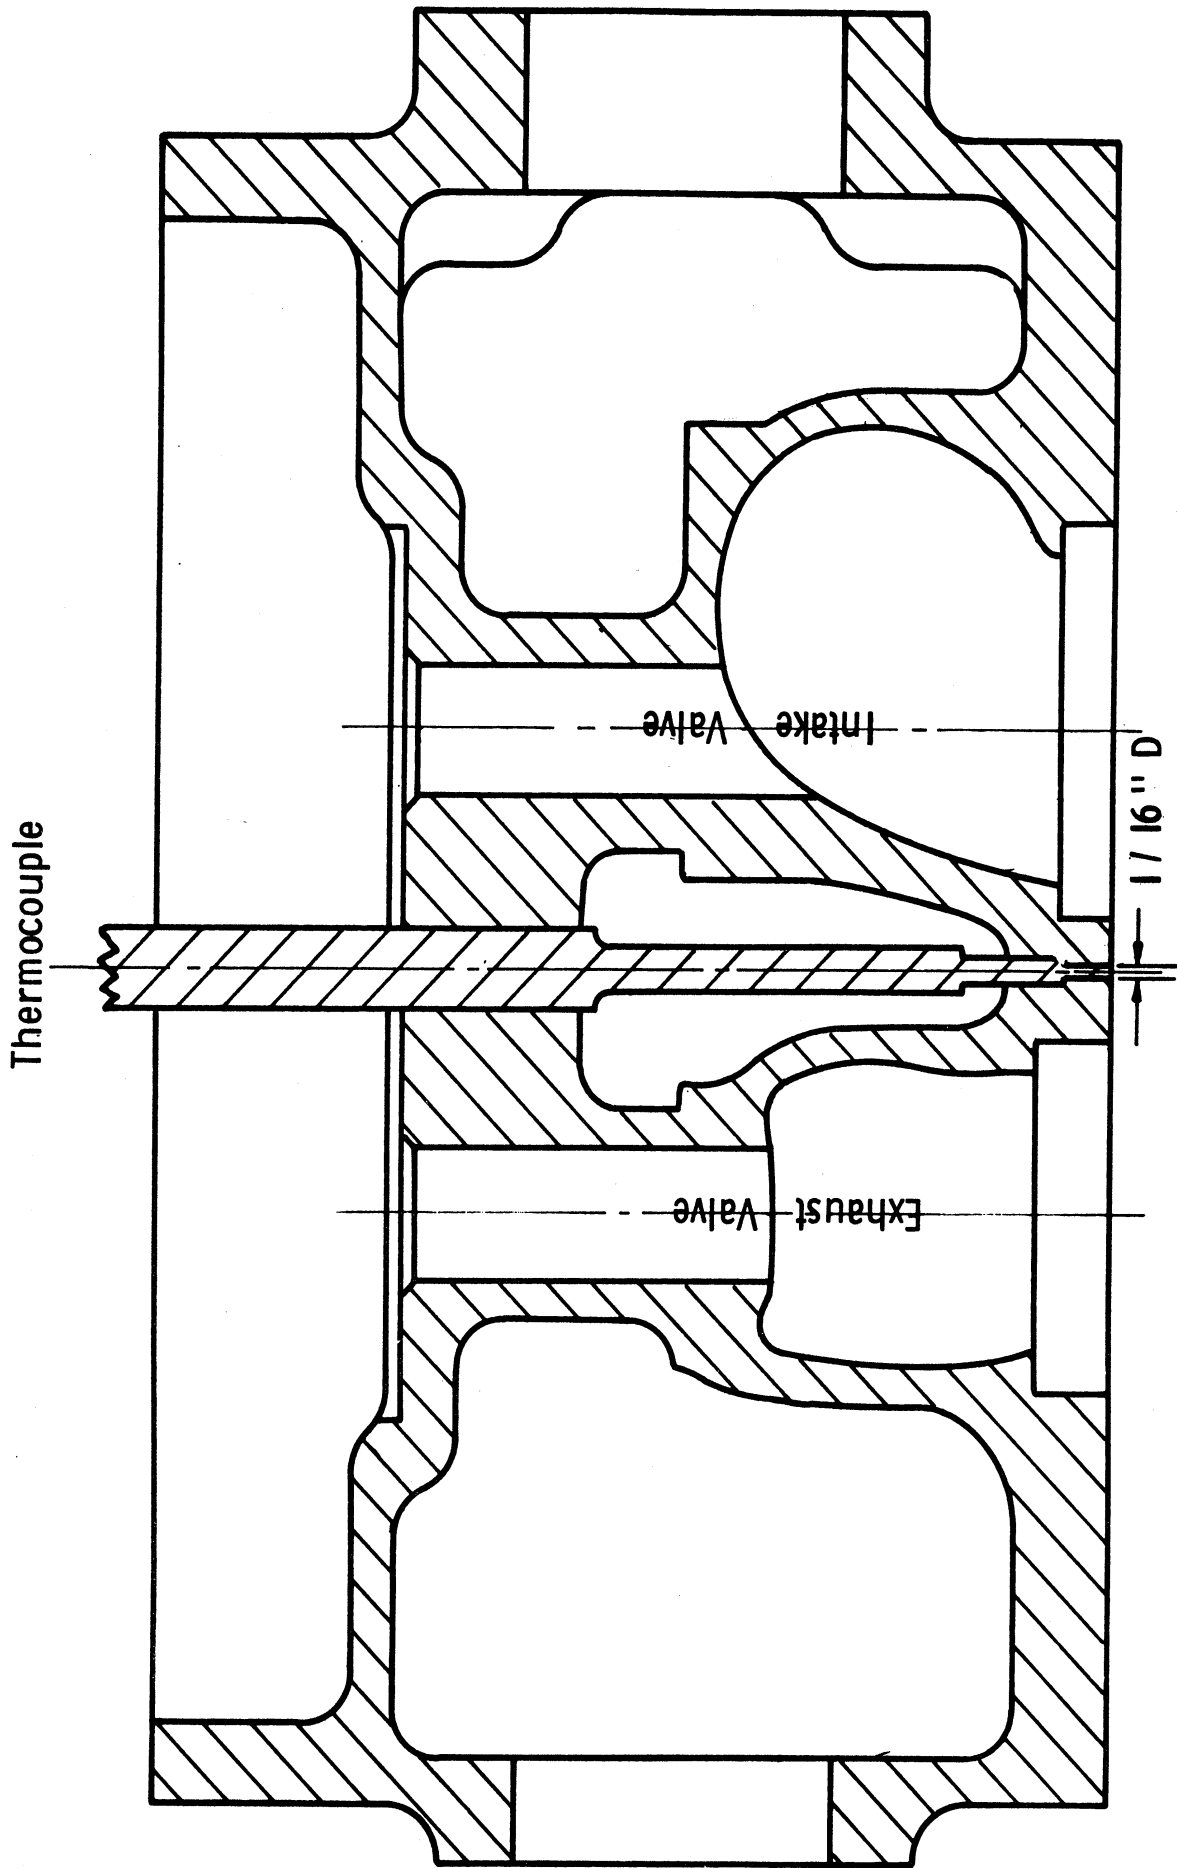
Surface thermocouple in cylinder head (ATAC engine).
